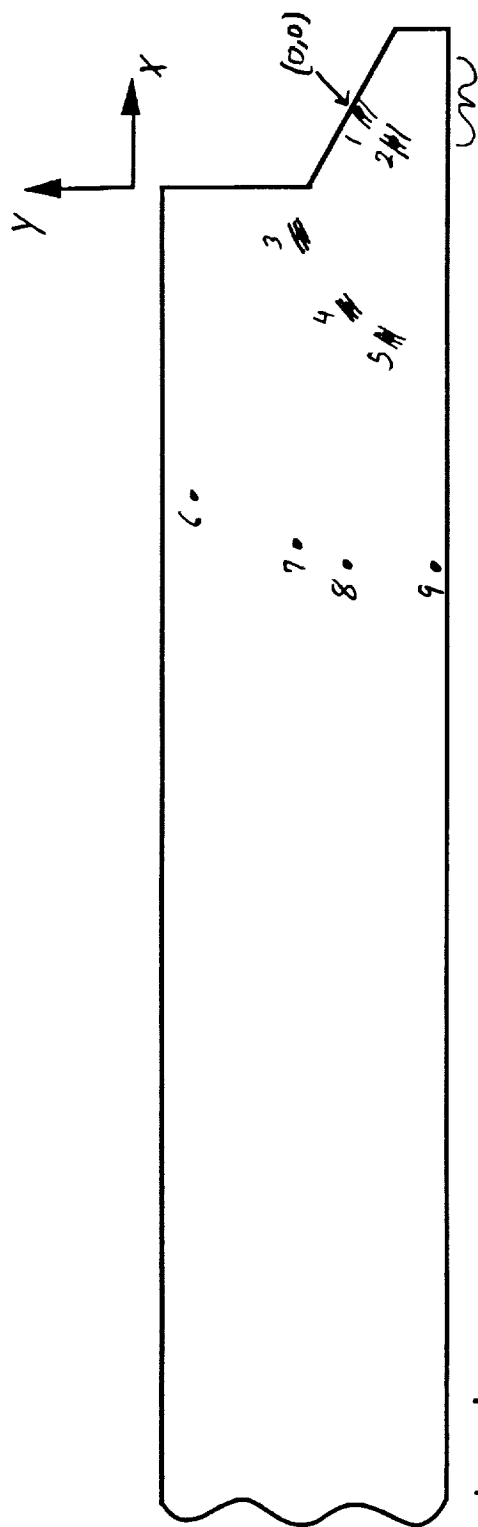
Rivet hole schematic: Upper rivet row, hole number 4J12, fatigue crack growth is in the aft direction.
